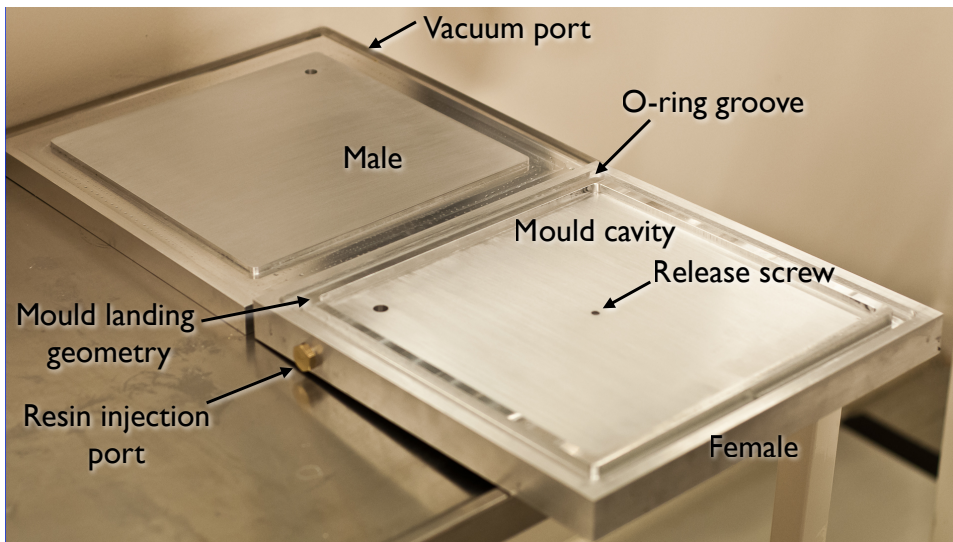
The mould tooling fabricated during the project work [27].
